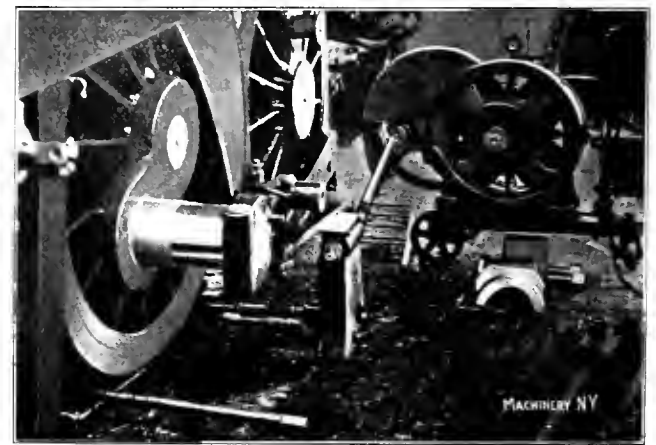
Valve-setting Machine, which is driven by an Electric Motor
